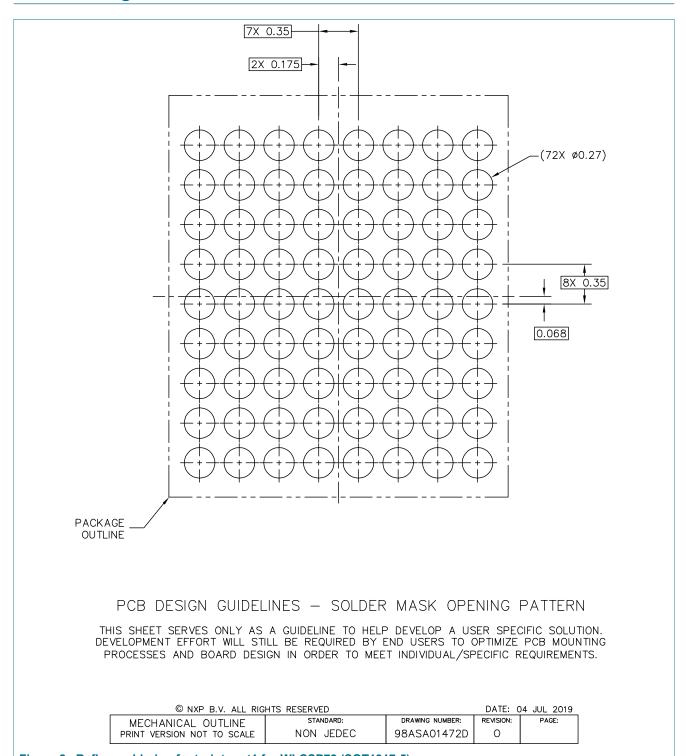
Reflow soldering footprint part1 for WLCSP72 (SOT1917-5)
